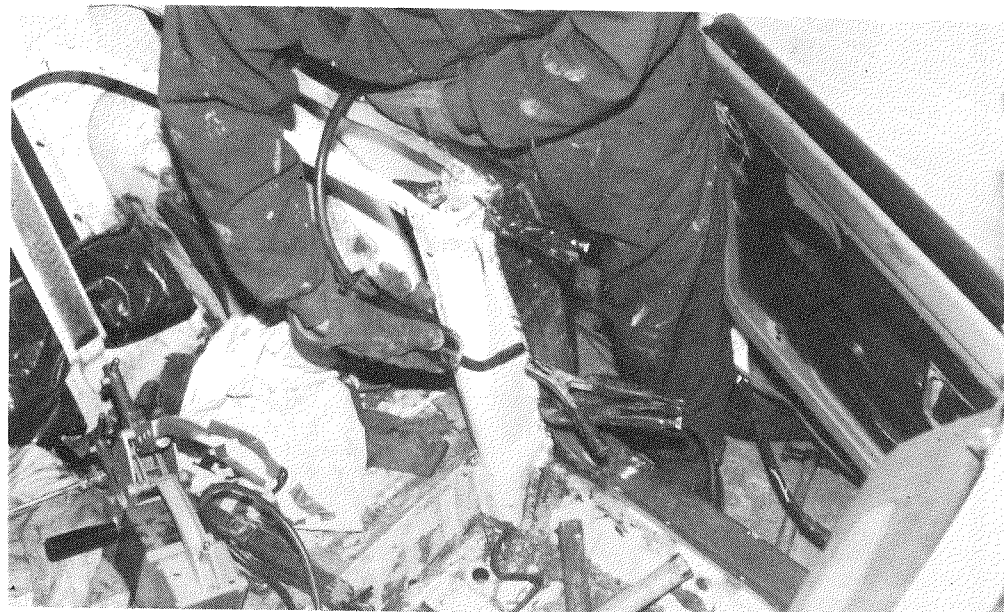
and at the top of the rear upright. A little braze might be alternatively applied here if you've the necessary equipment as it's less likely to crack in this flexible area than a welded joint.
